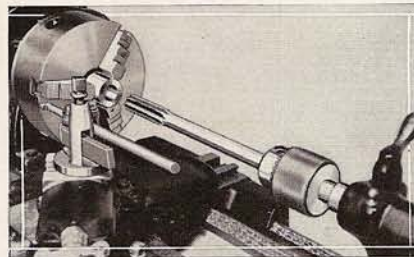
Reaming the Hole to Size in a Piece of Work After the Rough Boring Operation.
